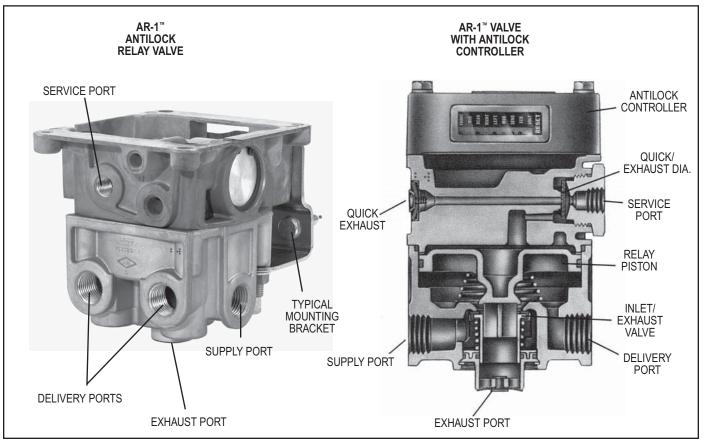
AR-1™ ANTILOCK RELAY VALVE ASSEMBLY
